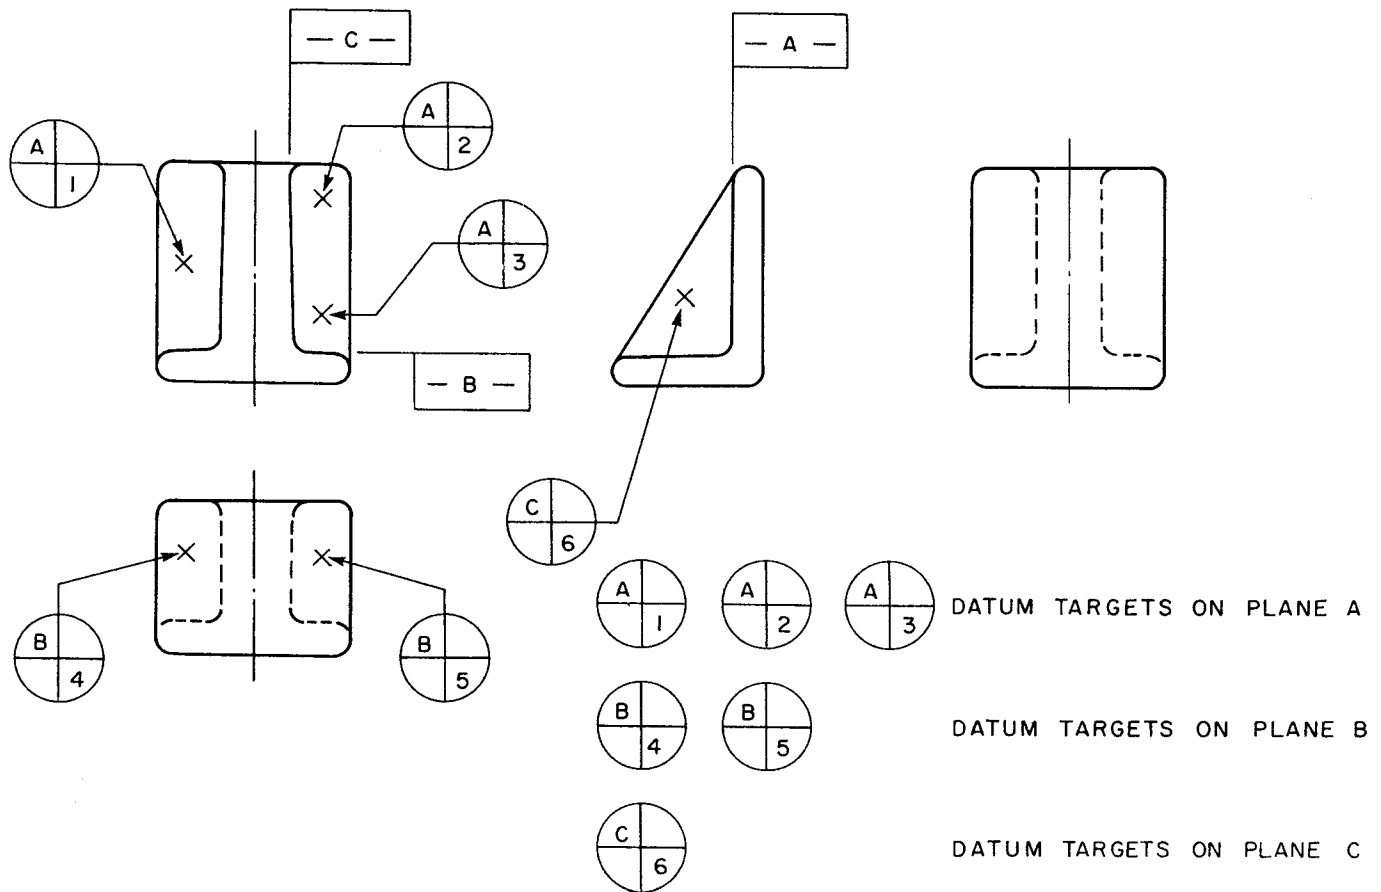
Illustration of establishing datum planes for a casting, using a datum target system (1).
